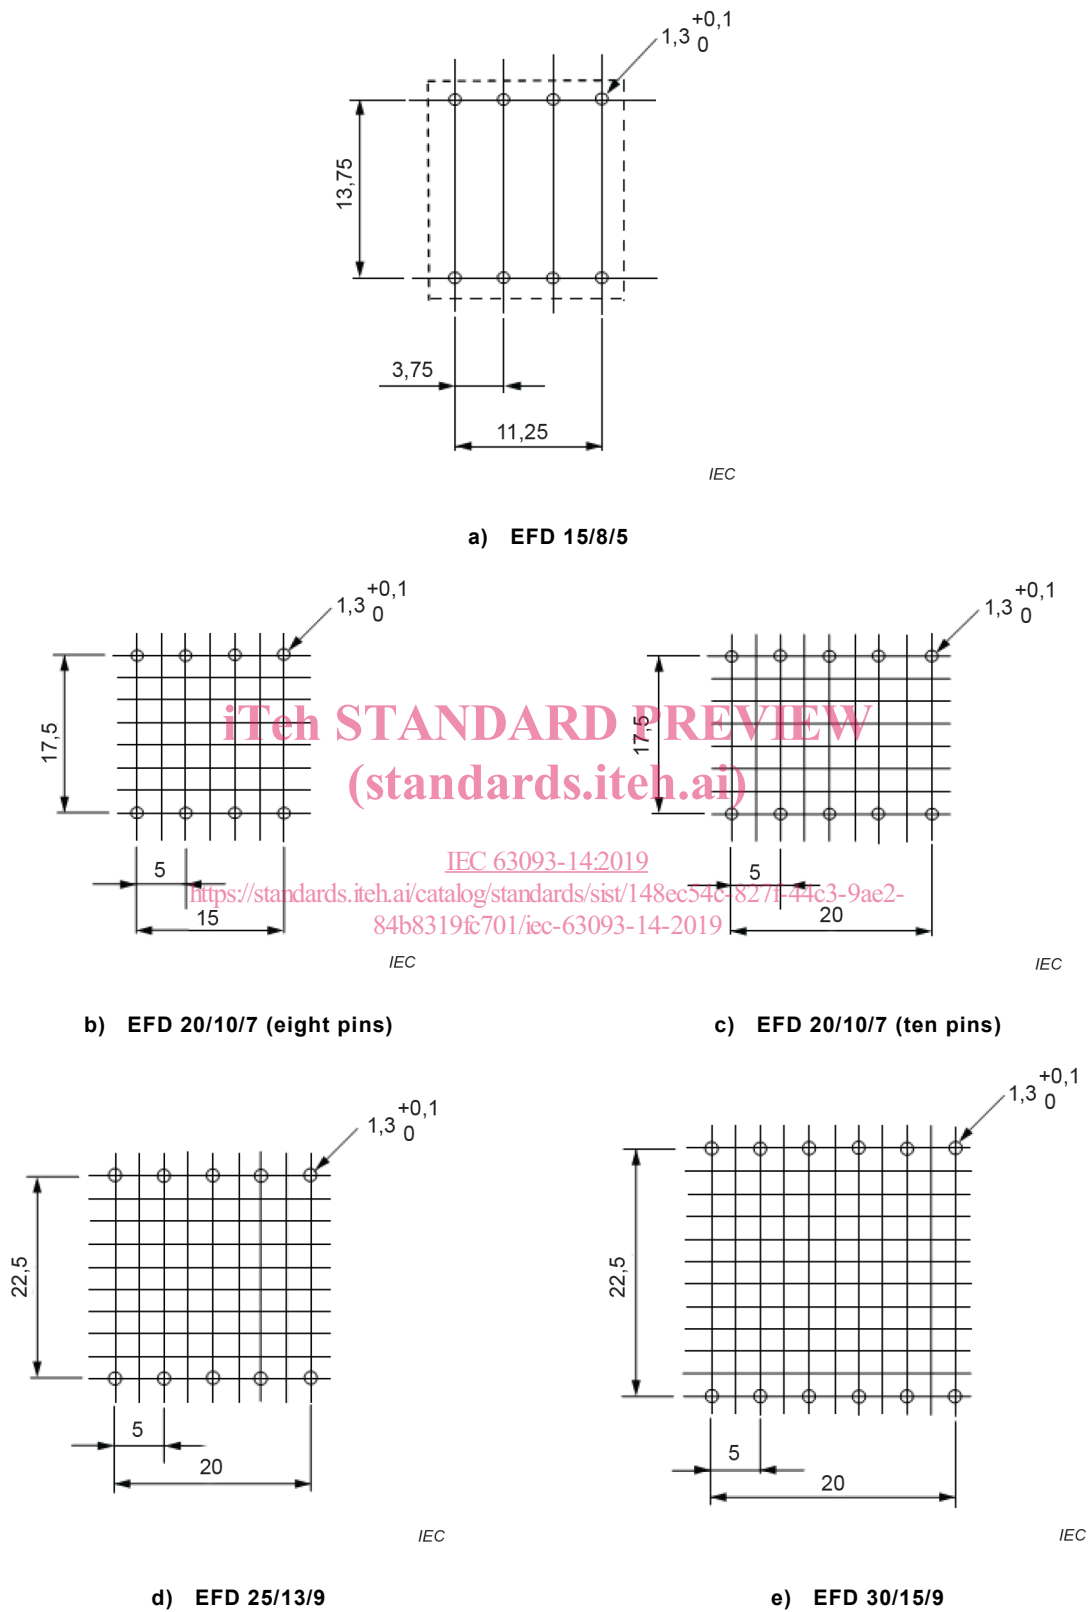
Locations of pins (PTH type) viewed from the upper side of the board
